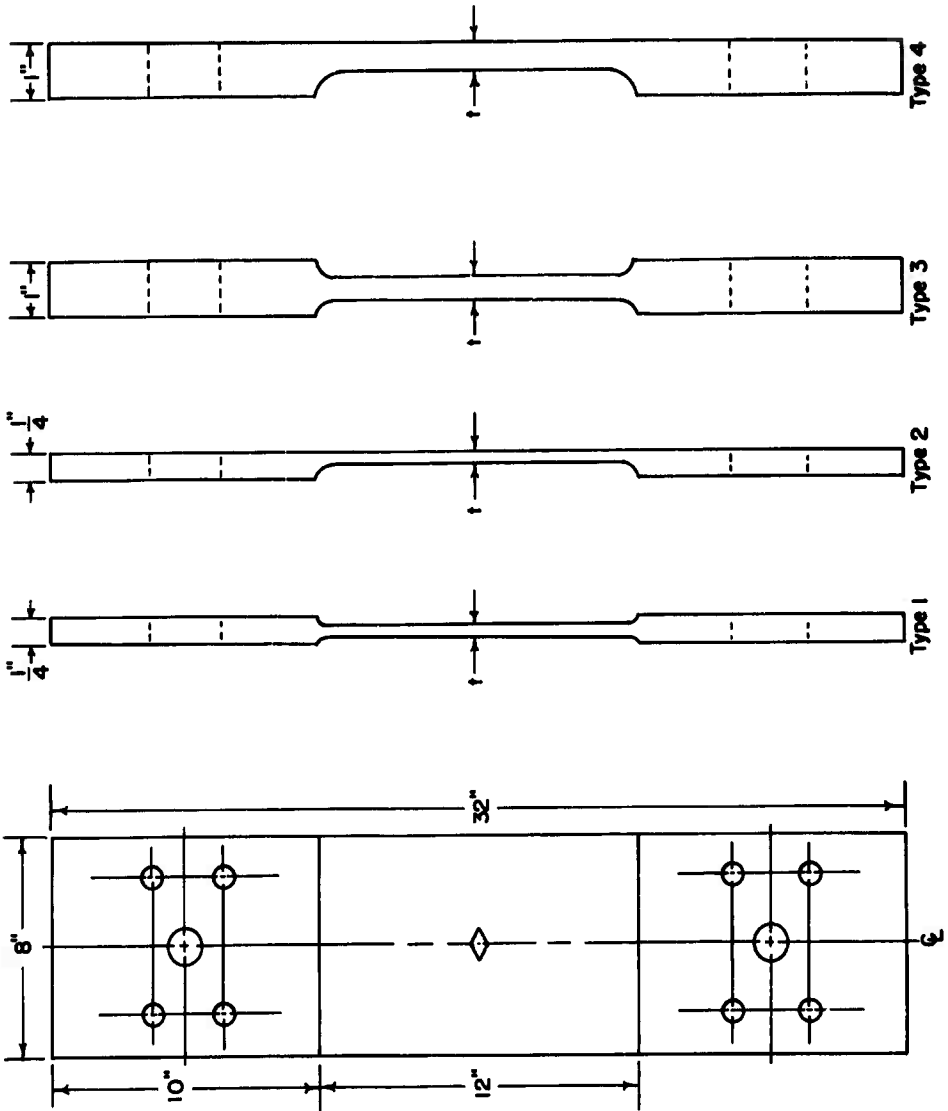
DETAILS OF ALTERNATIVE SPECIMEN CONFIGURATIONS
